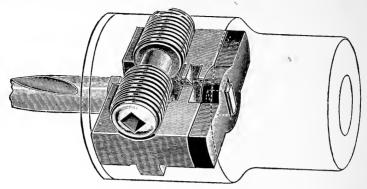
INTERIOR MECHANISM OF DRILL CHUCK.
